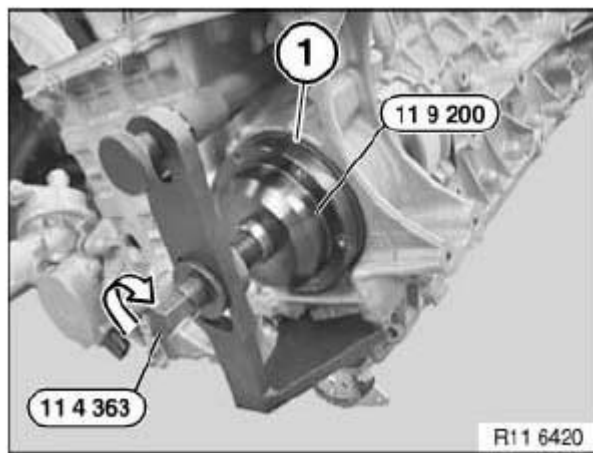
Identifying Special Tool (11 4 363), (11 9 200) And New Sealing Cover
